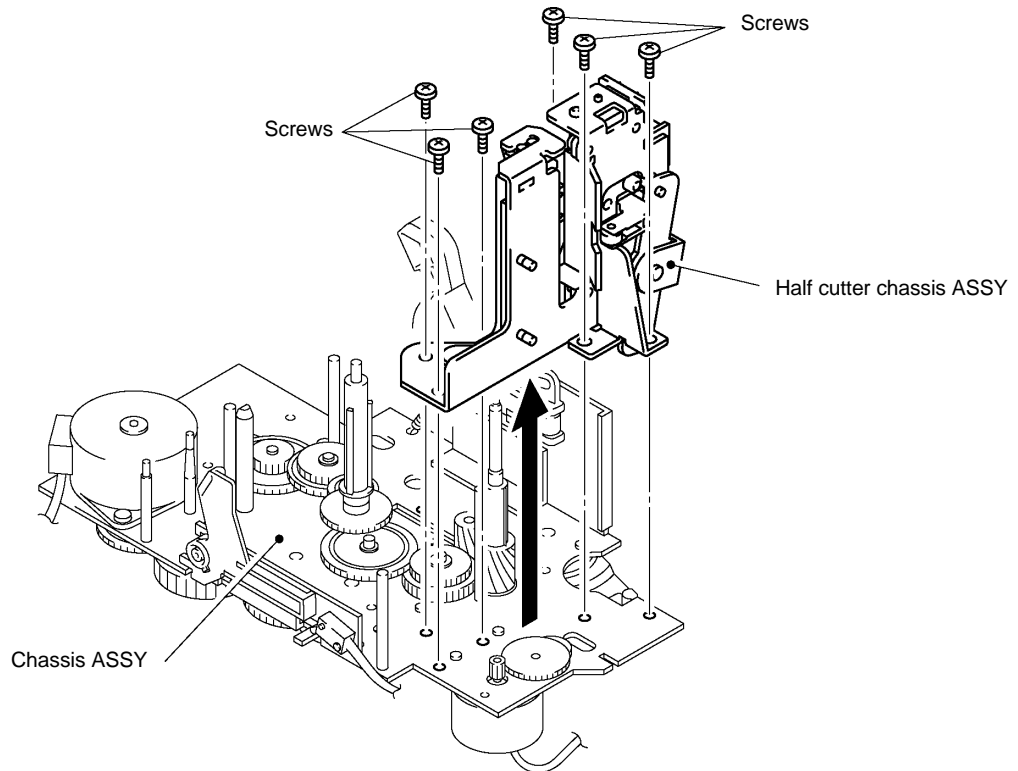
Removing the Half Cutter Chassis ASSY (1)
